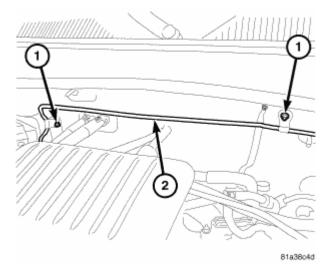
Identifying Brake Line & Mounting Clip Studs Courtesy of CHRYSLER LLC
